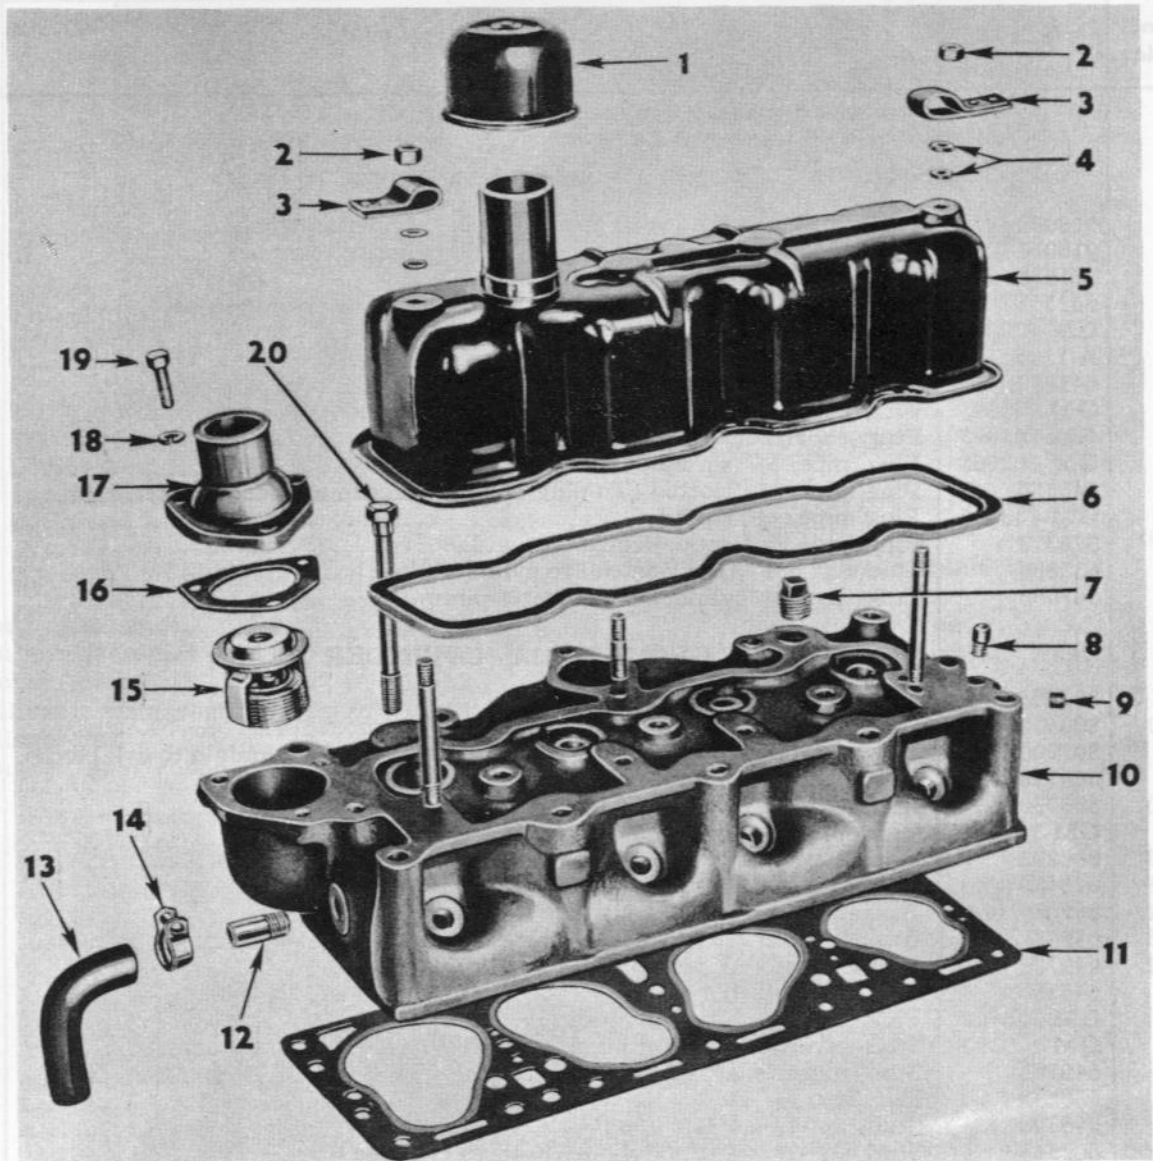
CYLINDER HEAD AND ROCKER ARM COVER—4F
